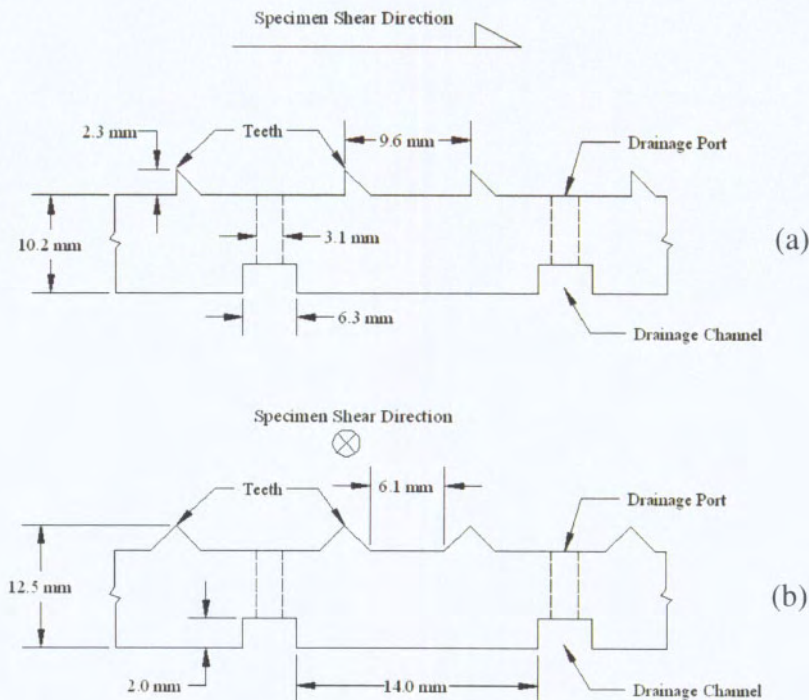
Detail section view of pyramid-tooth plate geometry: (a) in the direction of shearing, and (b) normal to the direction of shearing.
